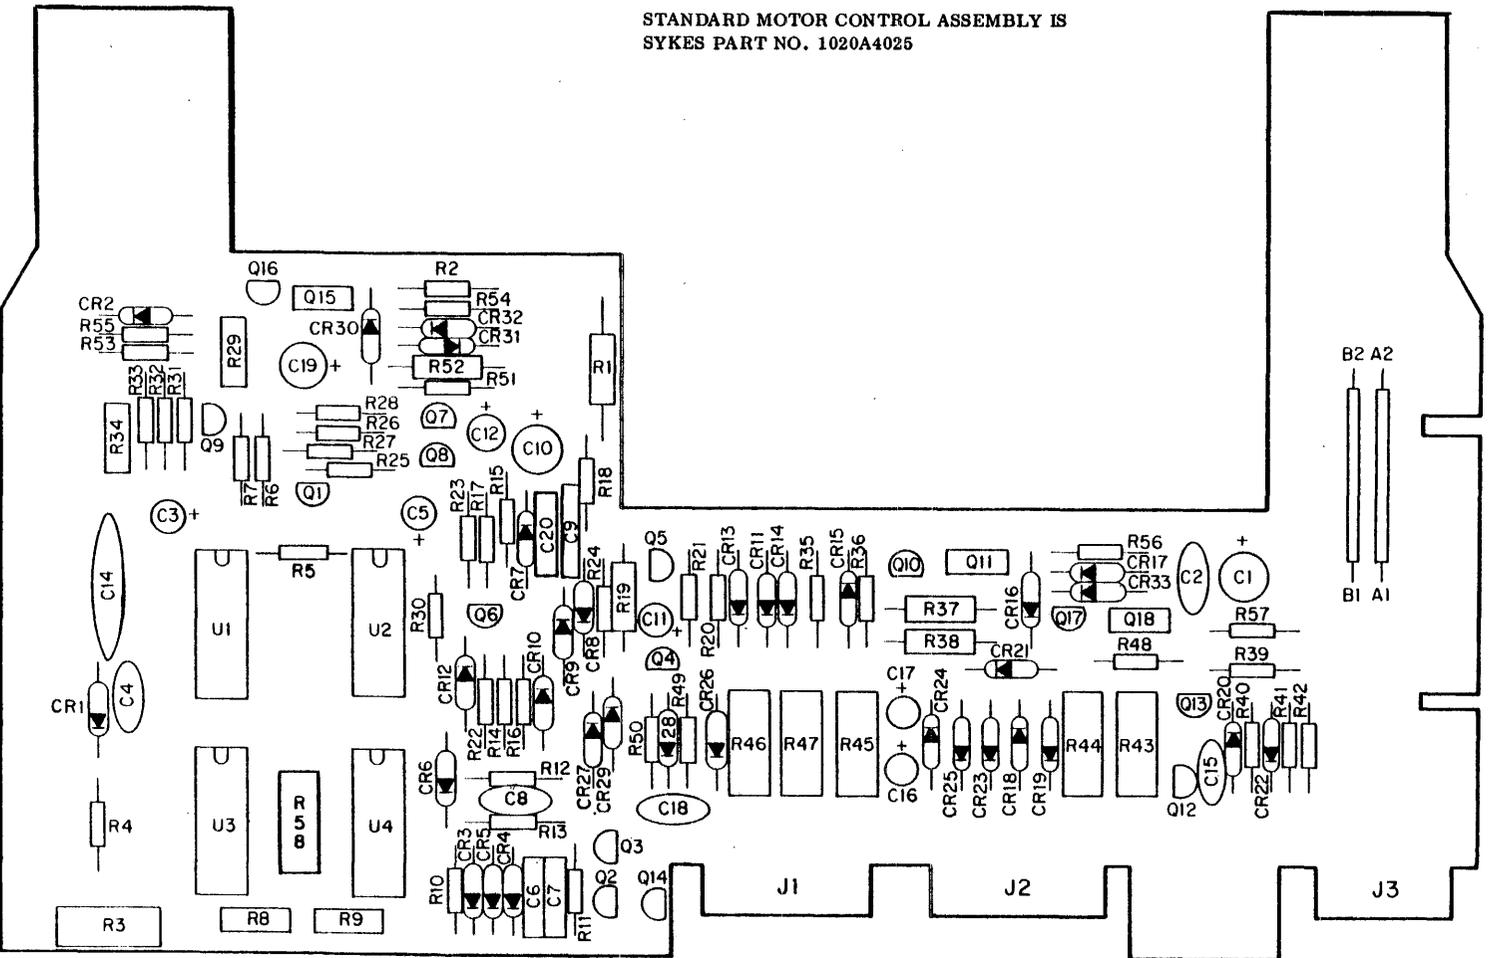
MOTOR CONTROL ASSEMBLY
